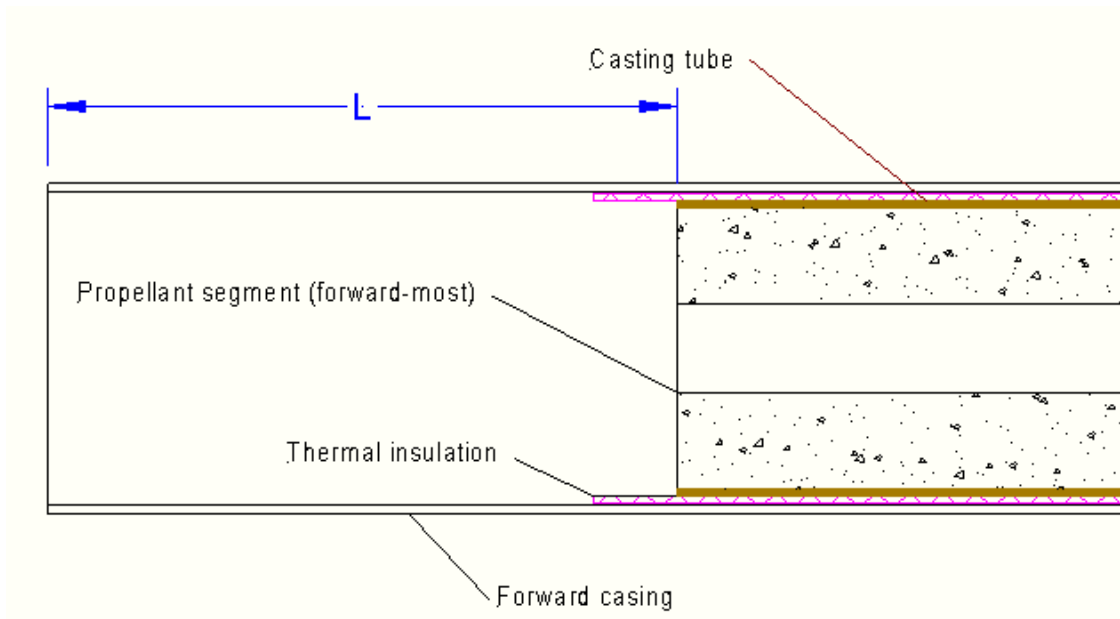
Definition of dimension “L” needed to determine spacer sizing.
